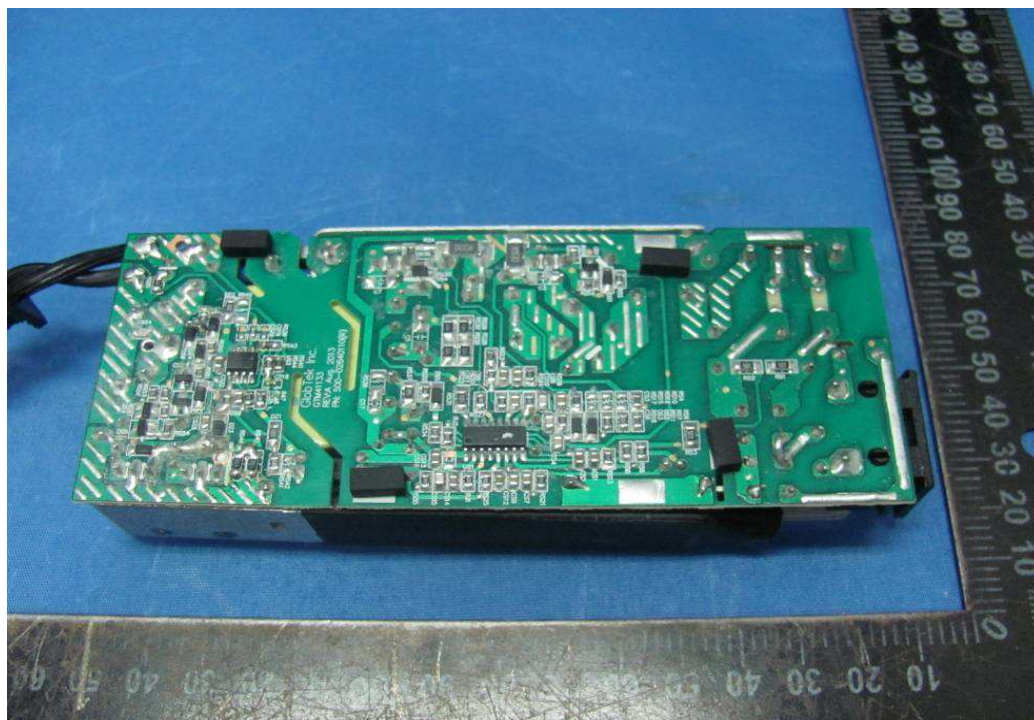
GT\*41133 series Soldering side view of PCB for power adapter model
